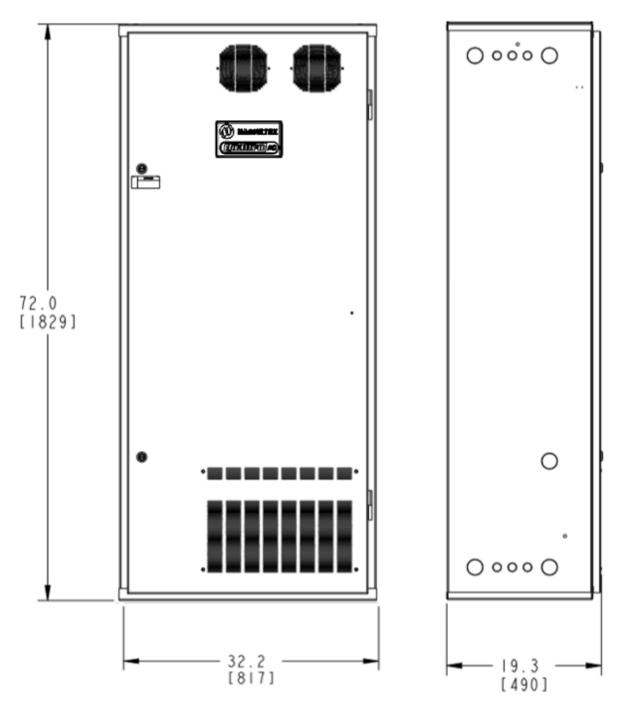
Dimensions with optional Customer I/O Panel (Enclosed)
